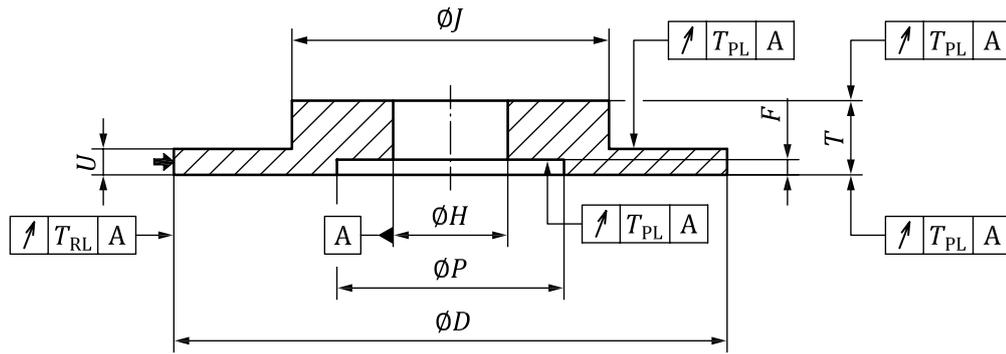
Grinding wheel, hubbed on one side, recessed on the other (Type 40)
